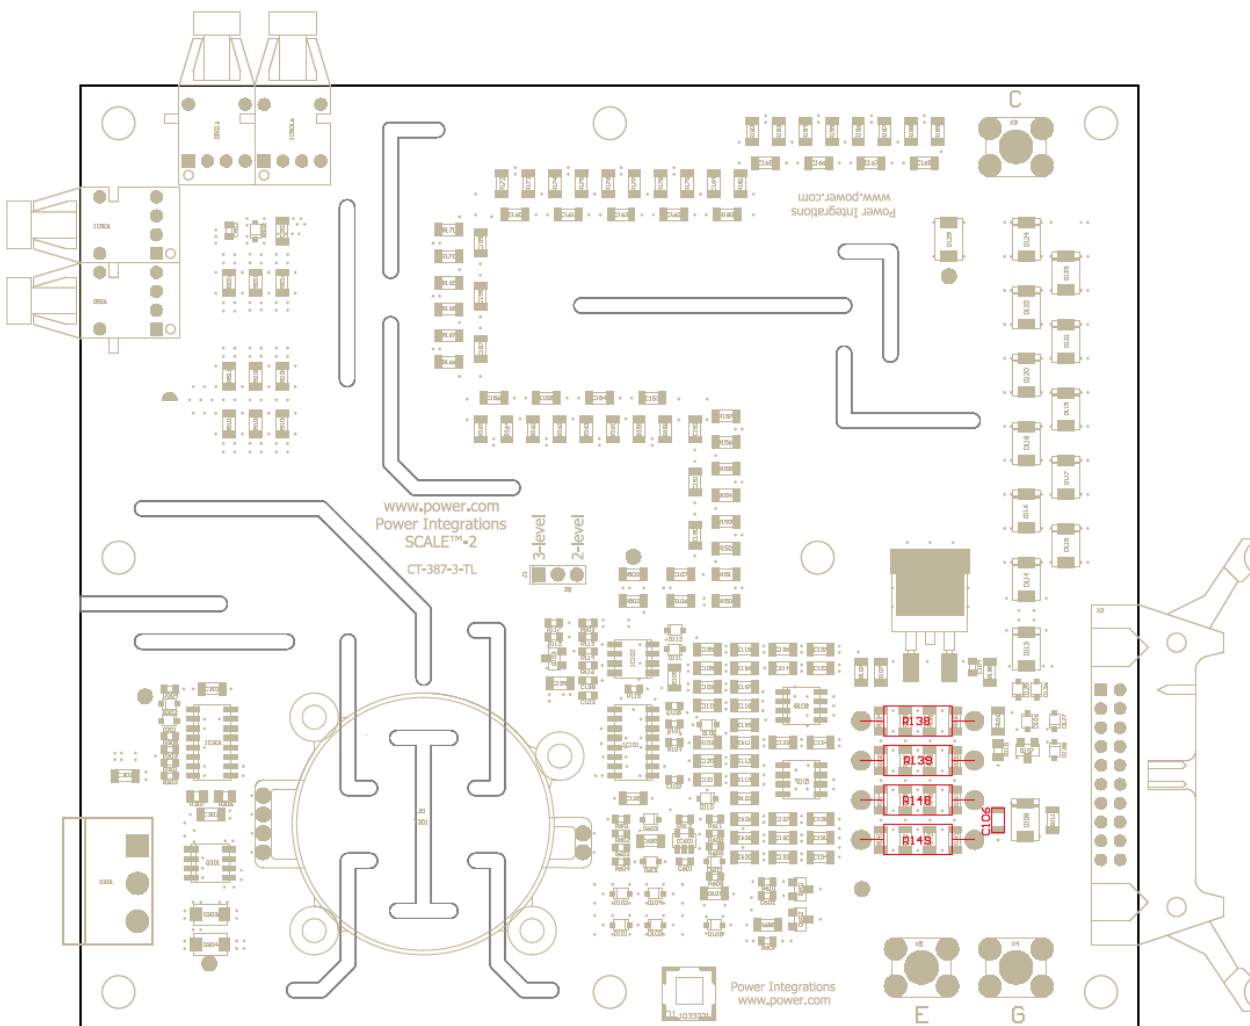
Assembly drawing of 1SP0350V with highlighted gate resistors and auxiliary gate capacitor
